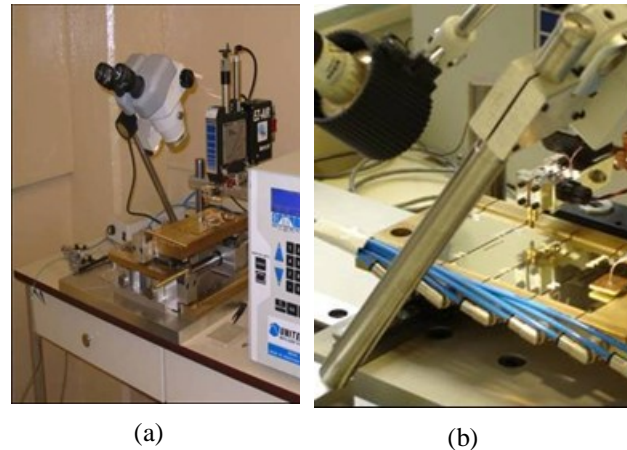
(a) Welding system. (b) Soldering process.
